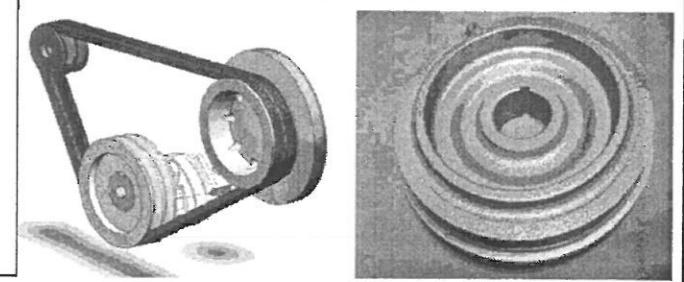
shows a series of pictures of a PULLEY ASSEMBLY, as well as an exploded view of how the components of a similar, simplified system are assembled.
